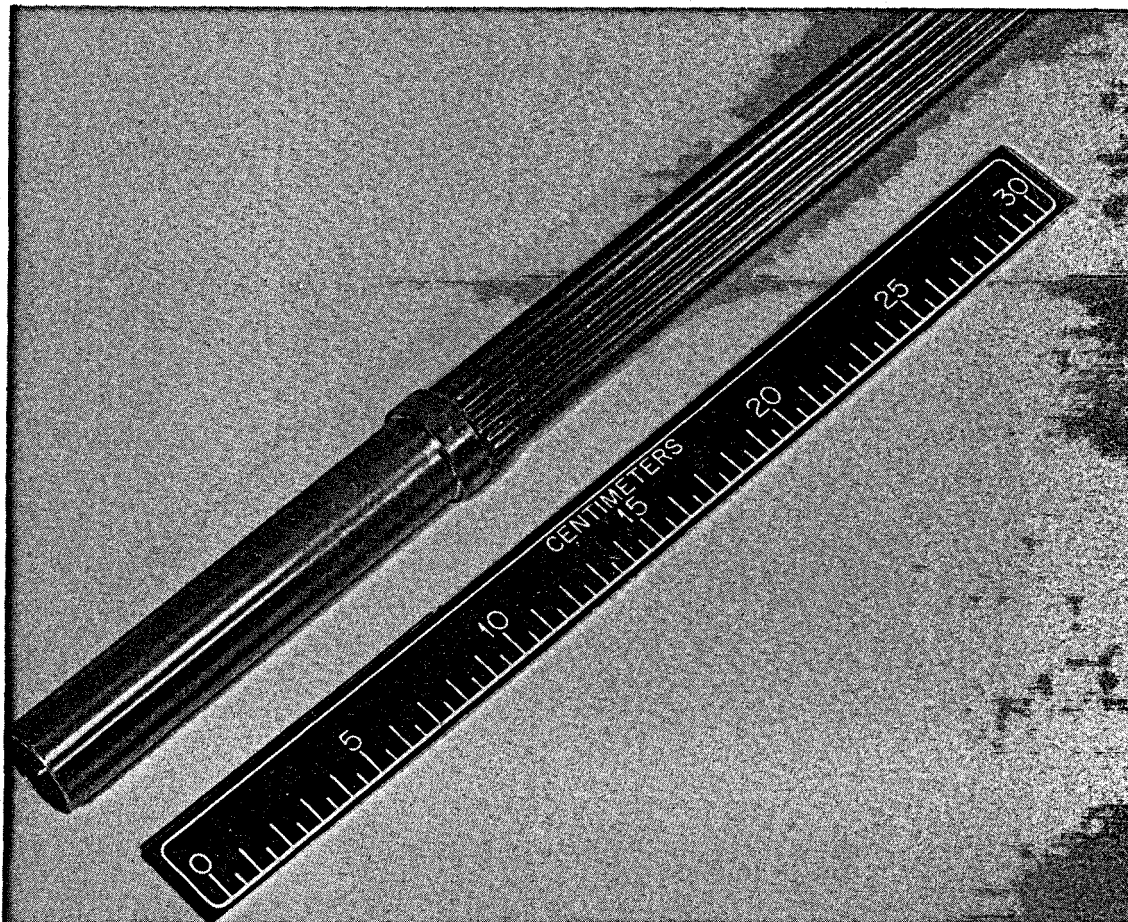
Sleeve adapter installed on sample fluted tube.
